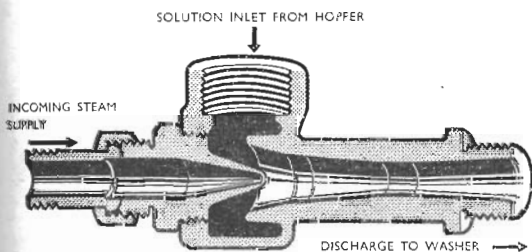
Arrangement of No. 3 "Cosmo" type steam injector.
